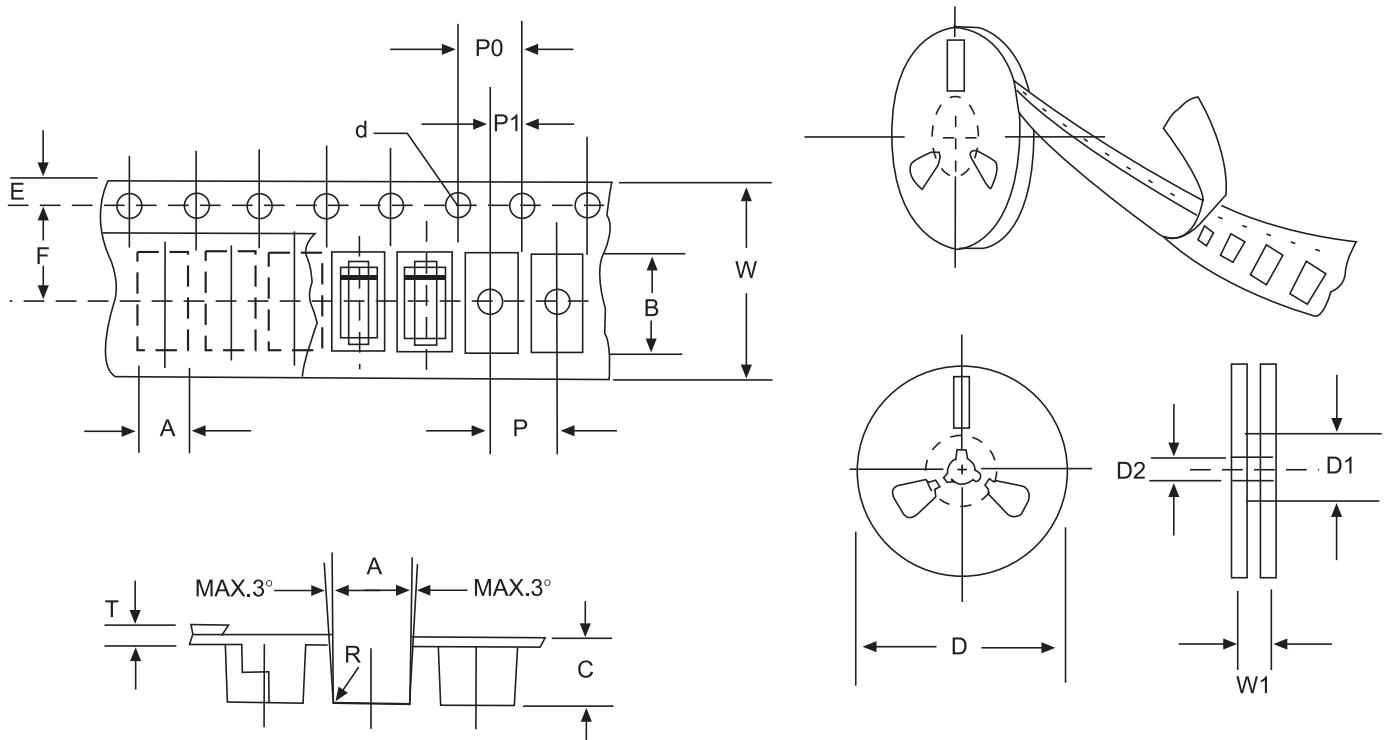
FIG : CONFIGURATION OF SURFACE MOUNTED DEVICES TAPING
